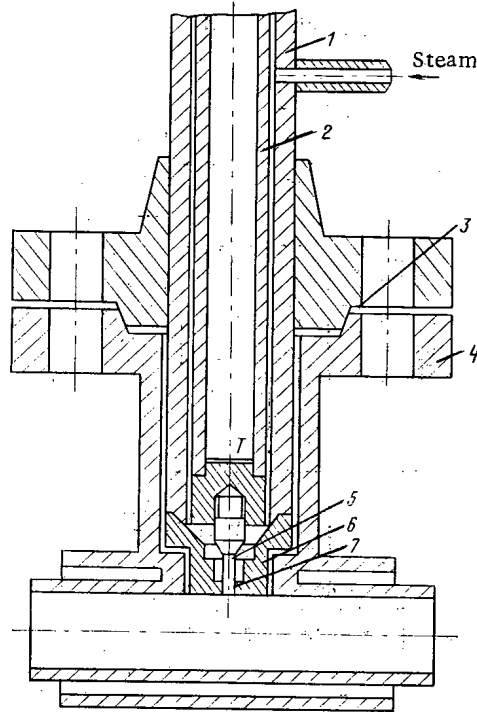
Steam injection unit: 1) housing; 2) steam; 3) seal; 4) pipe flange; 5) valve; 6) seat; 7) valve sealing flange.
